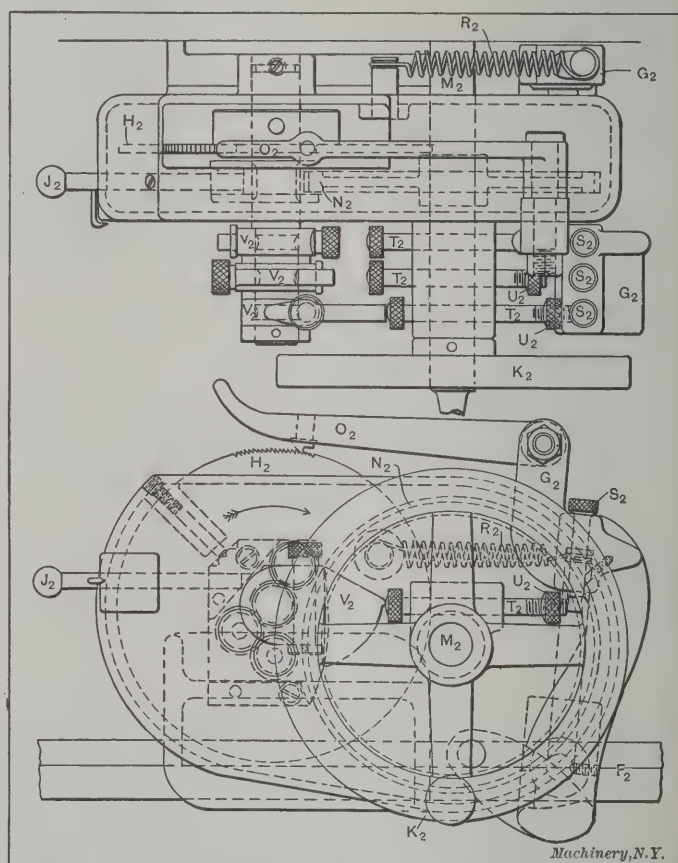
The Cross-feed Mechanism, with Automatic Diminishing Device and Stop
